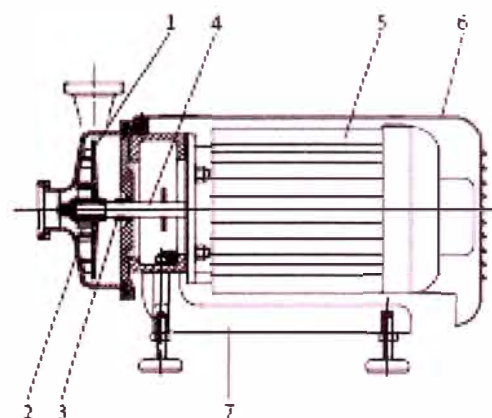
Sectional drawing of Euro-HYGIA® I Bio-SUPER on combi feet
